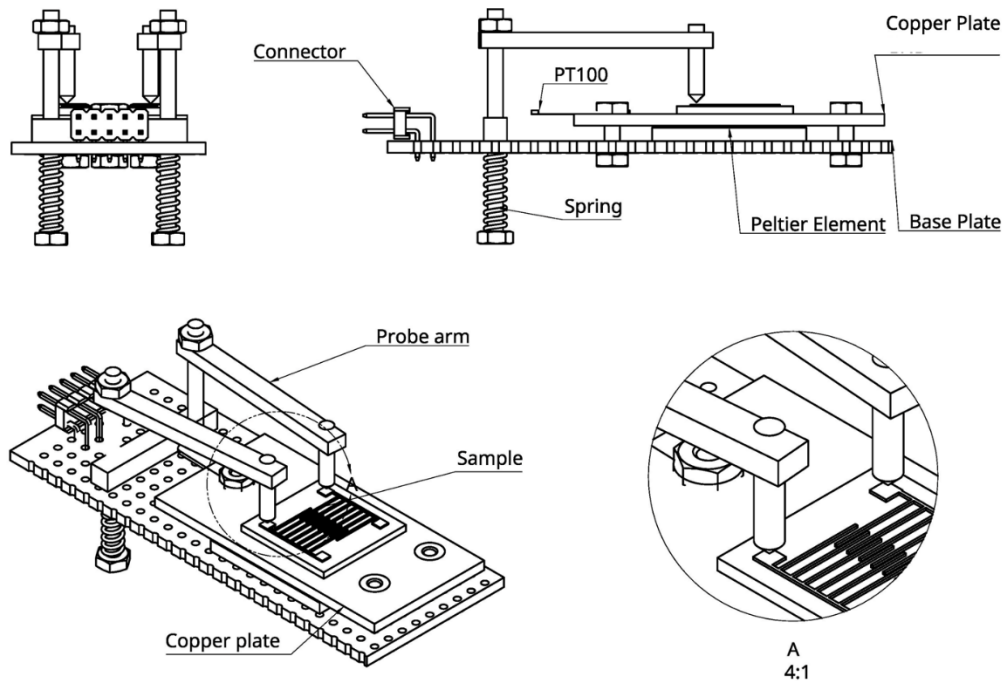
Technical drawing of the sample holder from different perspectives, designed for the gas measurement setup. Key elements are annotated in addition to a magnification at the contact point to the gas sensor.
